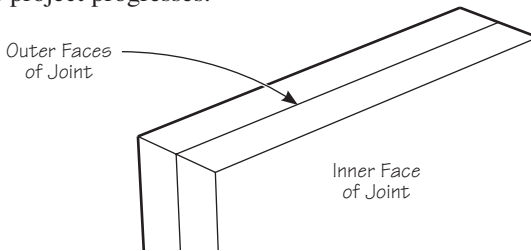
Place boards face to face, carefully aligned for layout. You might want to clamp them together to ensure they don't move.
